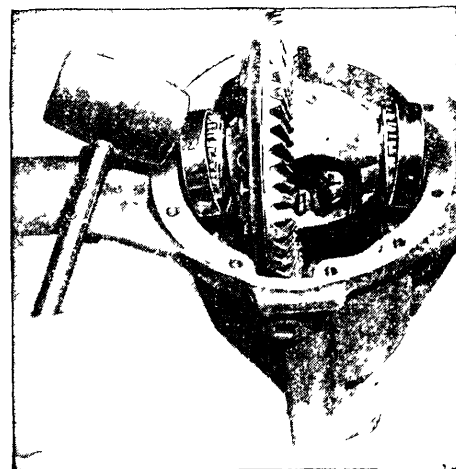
Installing differential and bearing cups in units with shim-adjusted bearings
